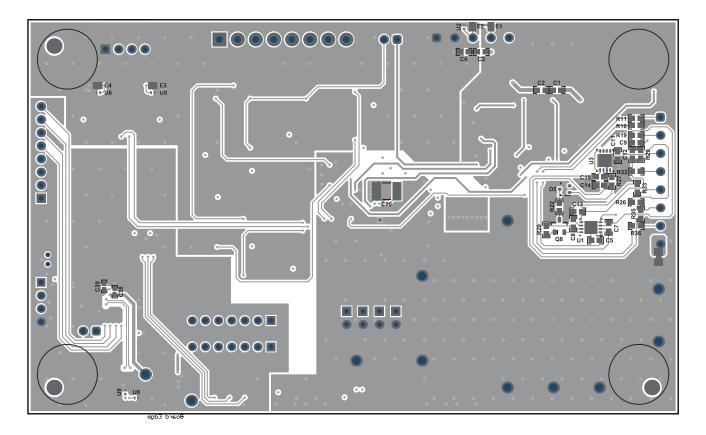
bq40z80EVM RevB Bottom Layer Composite
